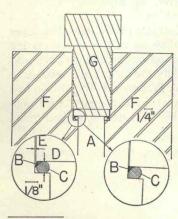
Cross section of the high-pressure closure plug with armored O-ring seals. The inserts show the armor configuration before and after initial application of pressure to the system. A, the high-pressure region; B, machine steel armor ring; C O-ring 7274 AN123872; D, O-ring squeeze; E, extru-sion gap; F, bomb walls; G, closure plug.
